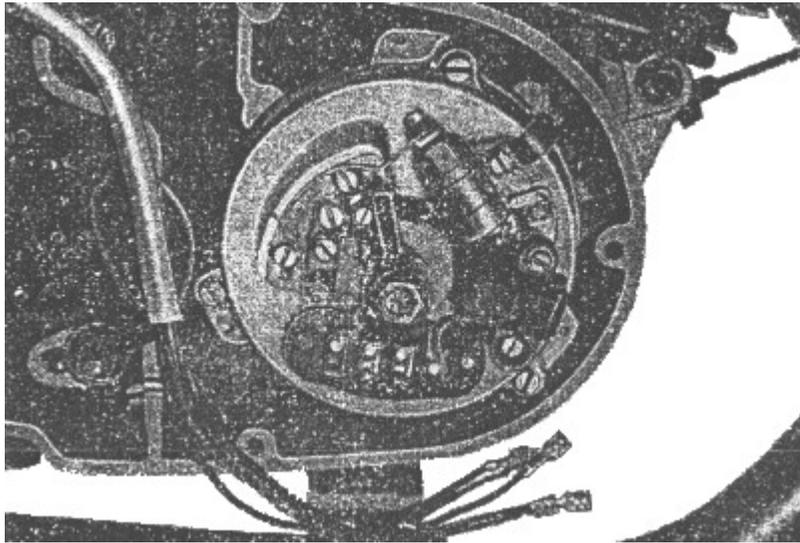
Withdrawing the cables from the three-phase current dynamo
